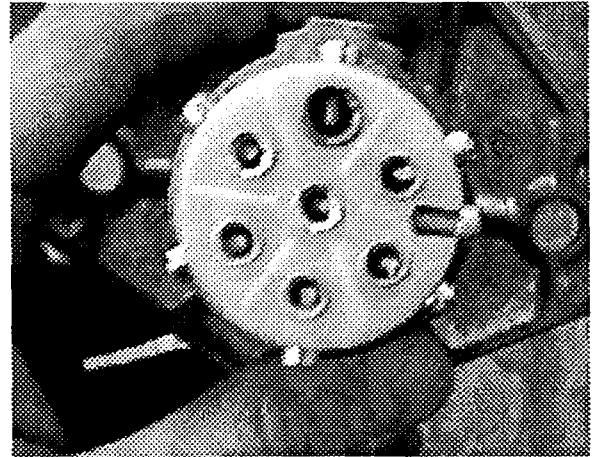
The ISO3731 receptacle suffered a broke wire termination screw during initial installation. A new connector was installed in its place.
